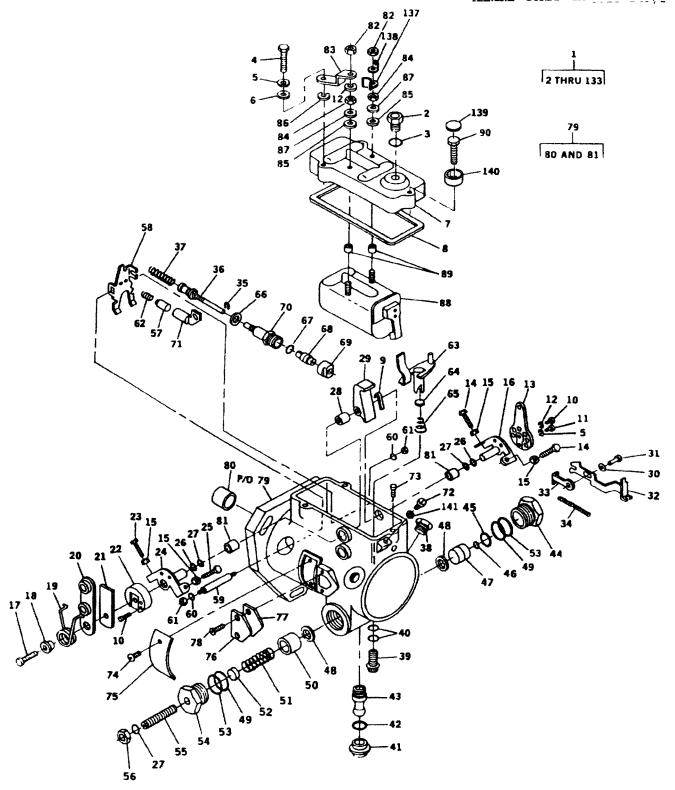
Fuel Injection Pump (Sheet 1 of 2)
